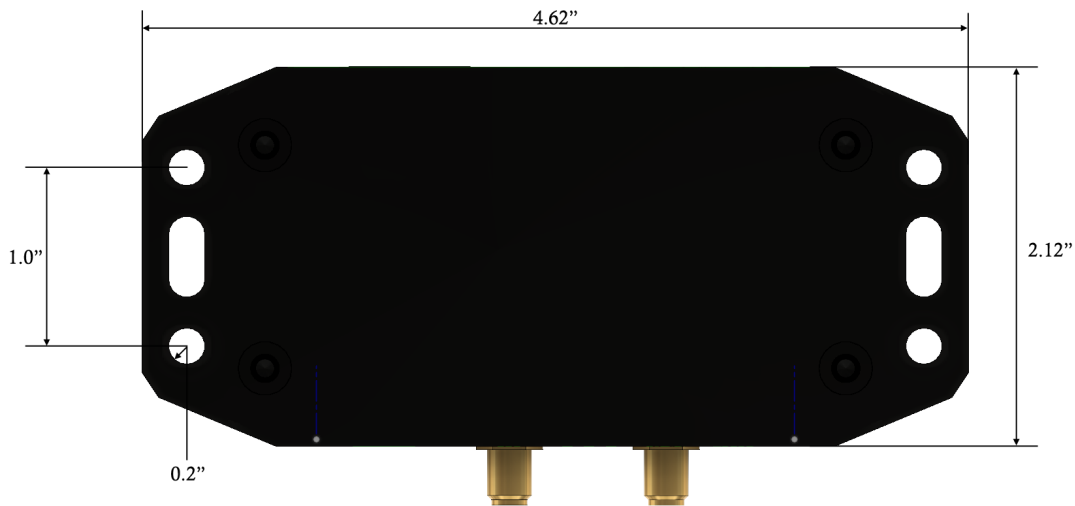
Footprint dimensions of the JT-DO1-12 timecode generator.
